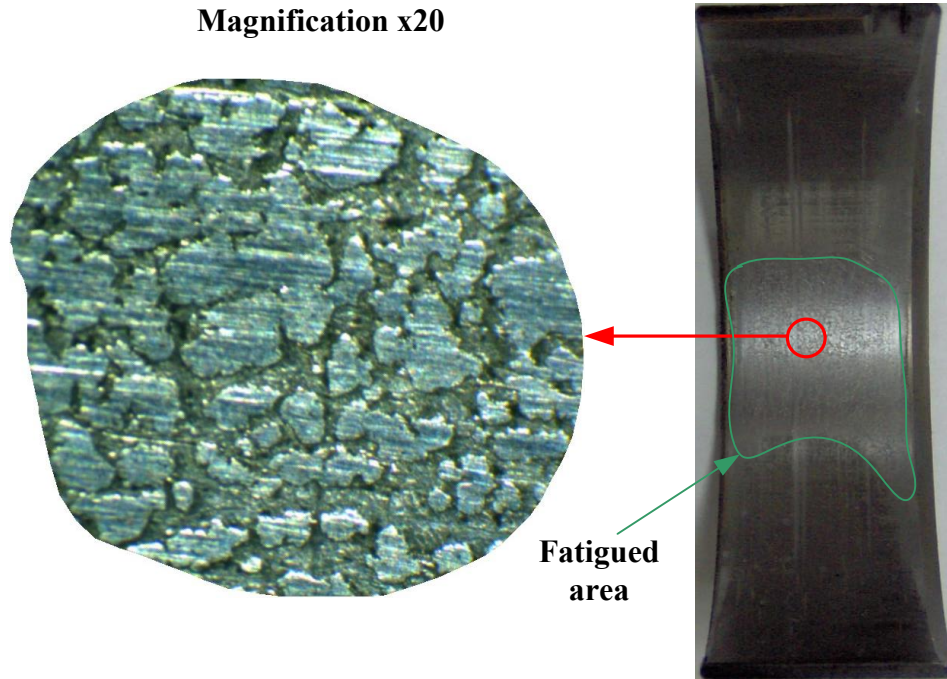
Conventional high performance bearing (non-King similar to King C 807XP) after King rig test (10,200 psi, 4,300,000 cycles)
